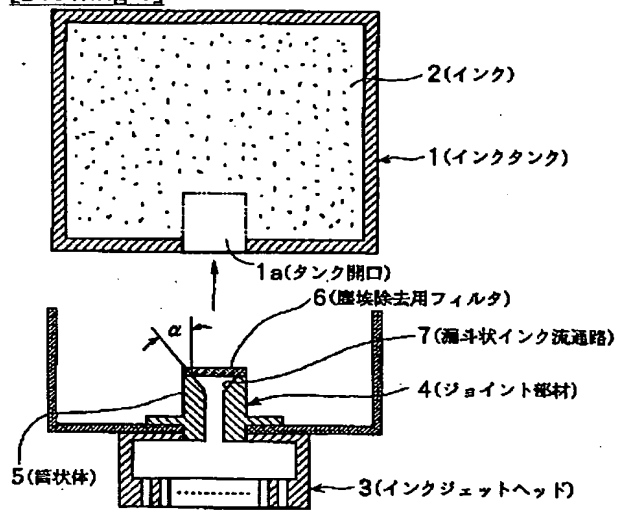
It is the explanatory view showing the modification of the ink supply pipe concerning an example.
